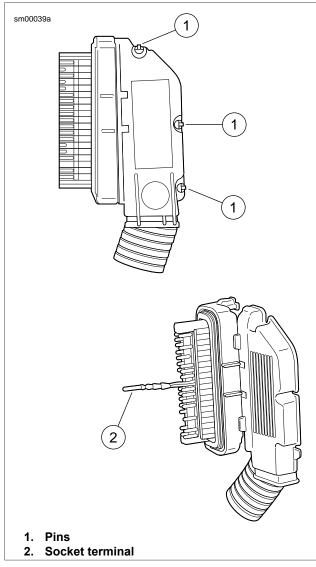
Delphi 100W Micro-Pack Sealed Connector: Separate Halves of Socket Housing
